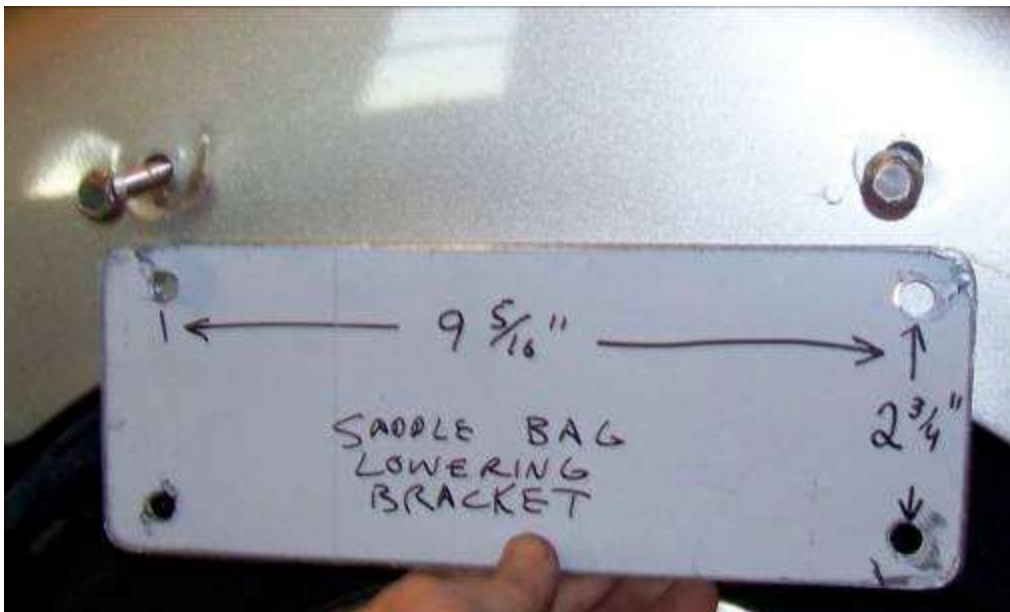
The new 1/8" aluminum upper saddlebag mounting plates, with the protective plastic skin still on.
